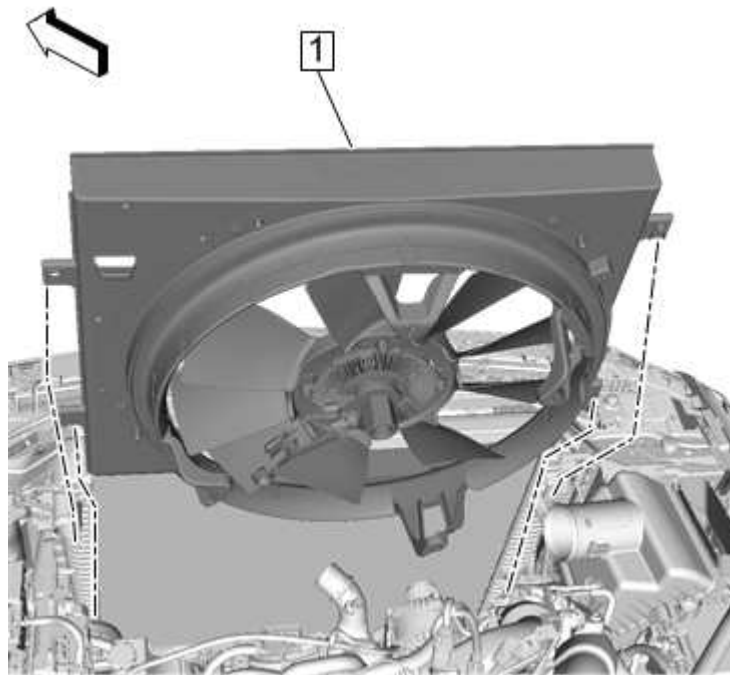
Fan Blade, Fan Blade Clutch And Engine Coolant Fan Shrouds Assembly
